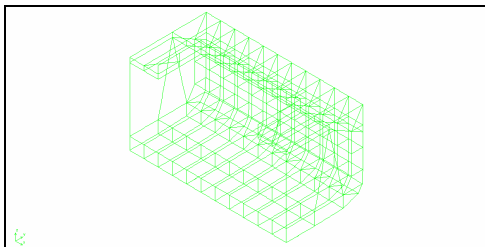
3D-CAD, BK, SWCM, cargo-hold 3.
